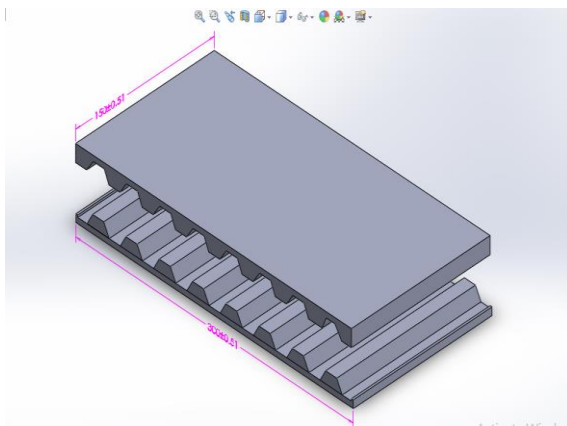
CAD model of the mold with dimensions 300 mm × 150 mm
